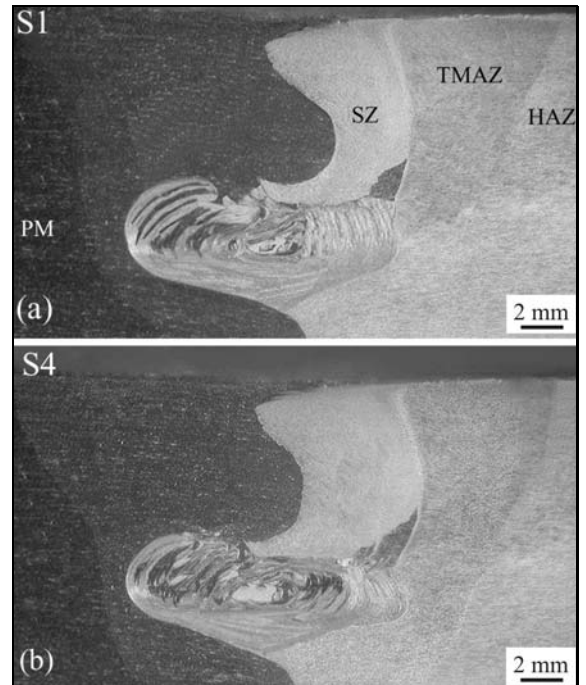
Microstructure of the nugget zone: (a) the specimen welded at rotational speed 1120 rpm using triangular tool, (b) the specimen welded at rotational speed 1400 rpm using triangular tool.
